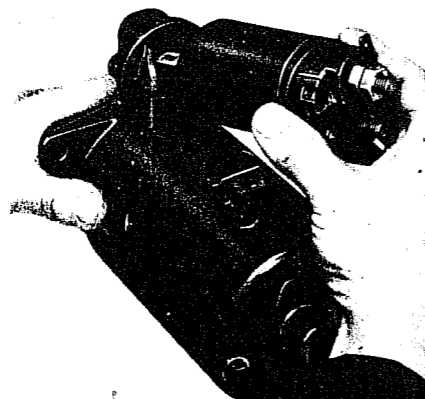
Engaging the solenoid pull-rod in the actuating lever.
